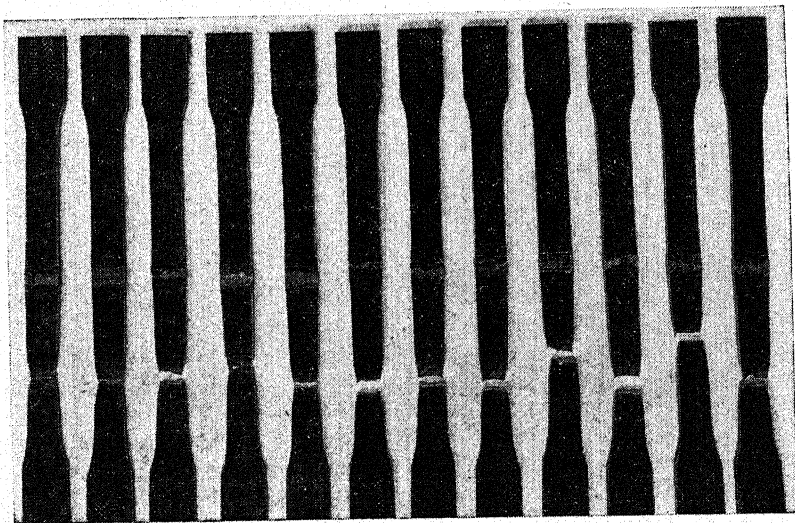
Arc welded tensile test specimens, all of which failed at some distance from the weld.
